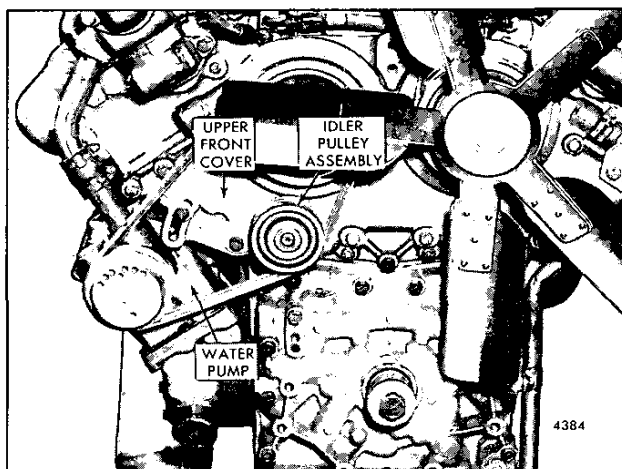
Typical Water Pump Idler Pulley Mounting
